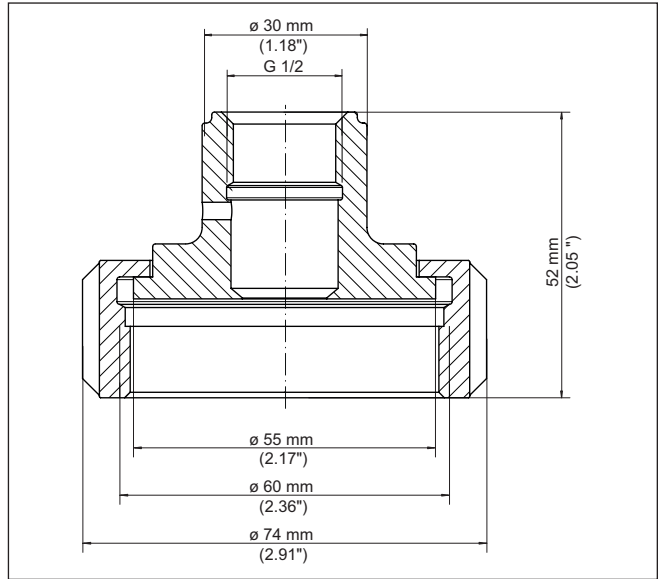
Dimensions hygienic adapter G $\frac{1}{2}$ (DIN 3852-X) on SMS DN 38 - Cone seal
